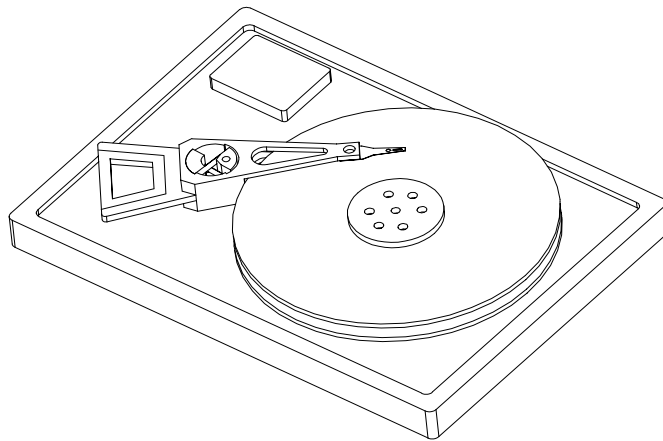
An assembly of the flexural pivot, actuator and hard disk drive.
